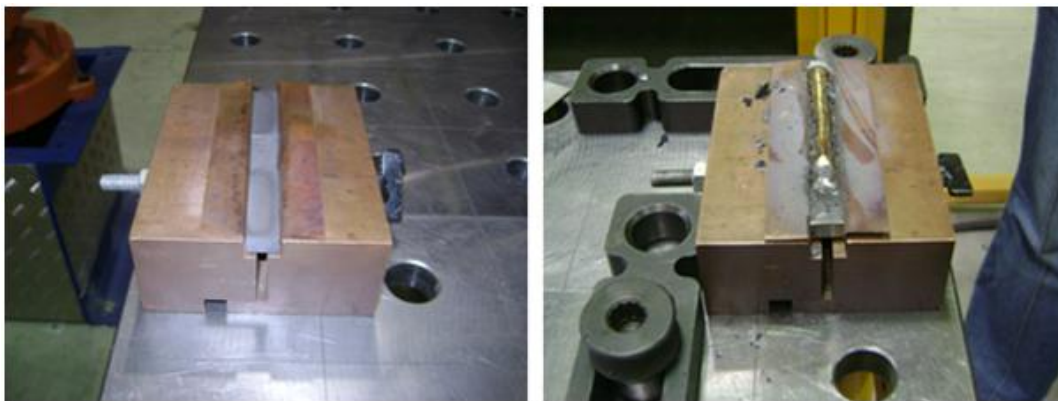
Welding fixture with test piece assembly before the deposition of the single weld and immediately after deposition of test run.
